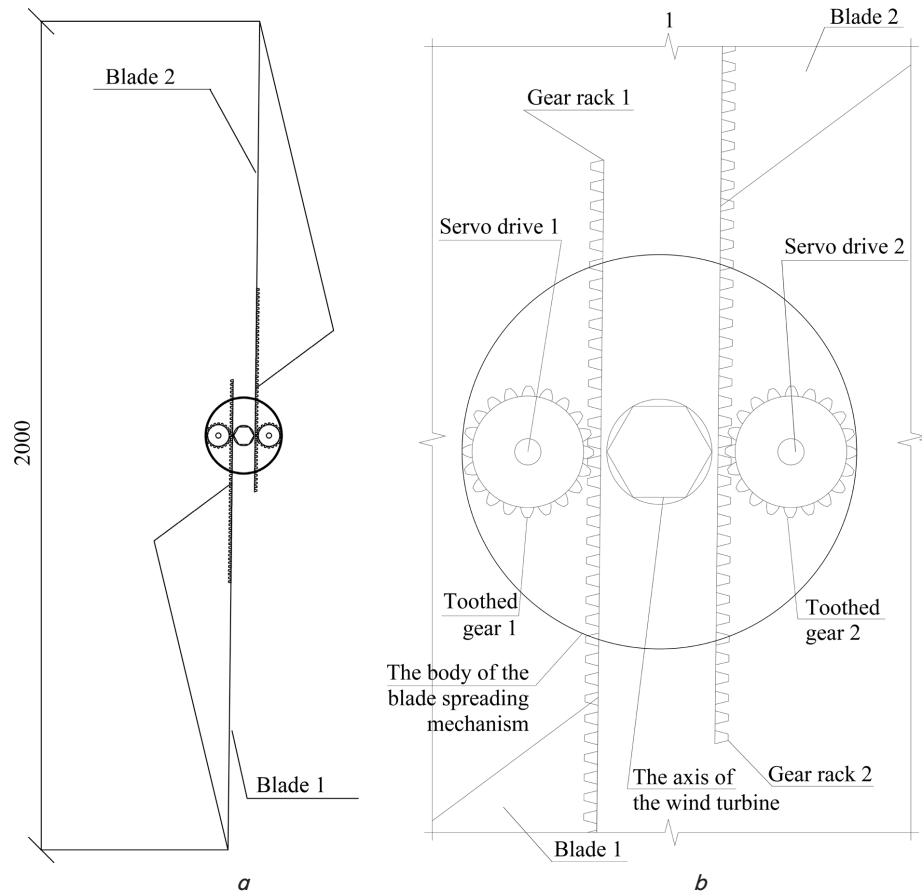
A wind turbine with a blade extension mechanism, the blades in the retracted state: a – a general view of the wind turbine; b – a close-up of the blade extension mechanism
